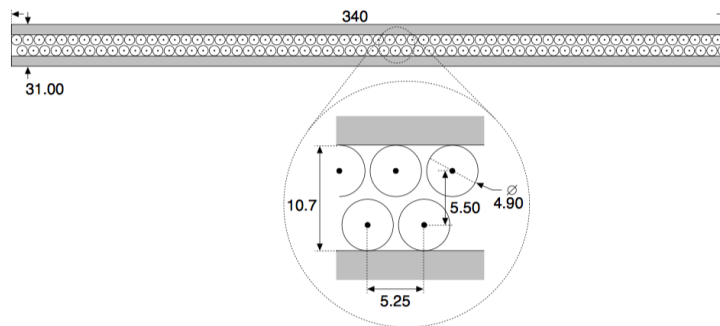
Cross-section of an OT plane with a zoom on the straw-tubes. The dimensions are in mm.
